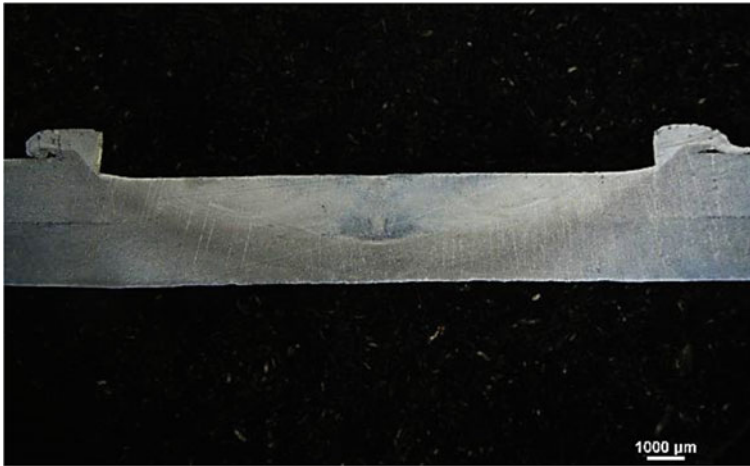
Cross-section of refilled FSSW joint using waste aluminium chips
